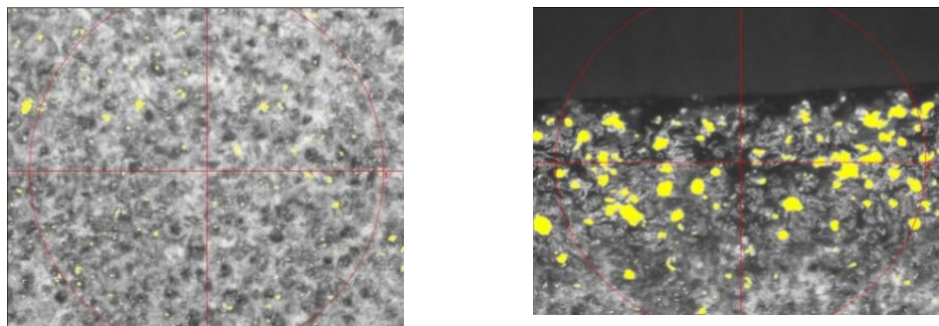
Structure of the grinding wheel: a) the grinding wheel before use b) the grinding wheel with a radial wear of 43.12µm (SEM image 1500 x zoom)
